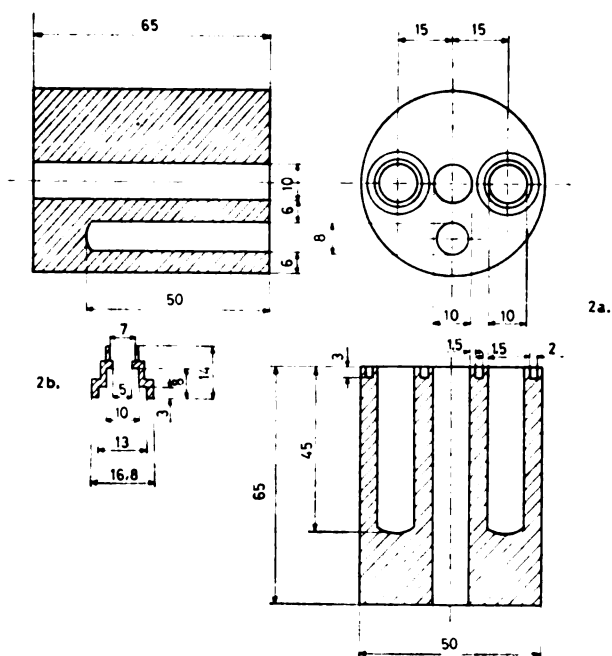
The sample cell; 2a. Top view and cross sections, 2b. The connection of the copper block. Dimensions in millimeters.
